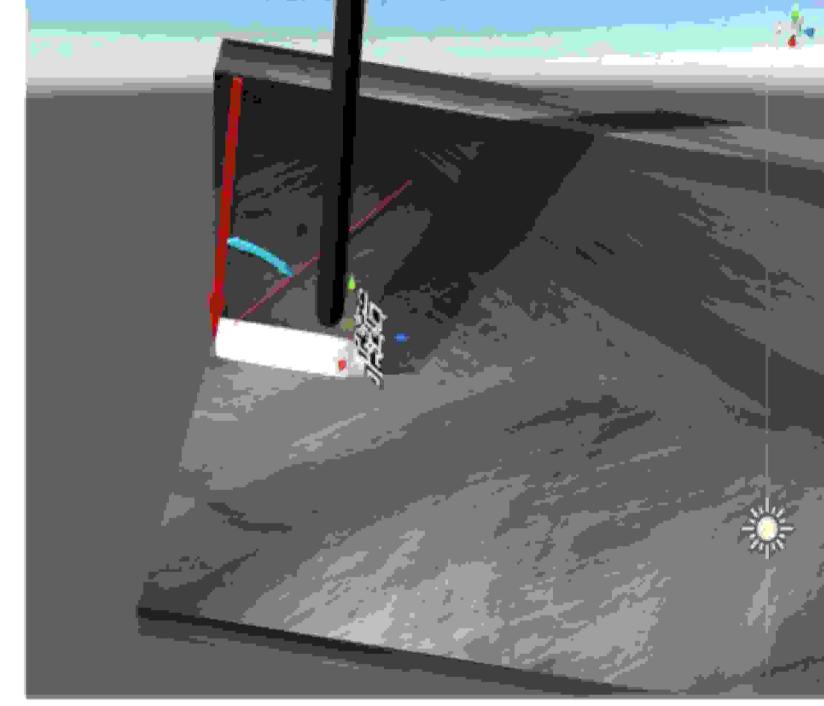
Virtual weld bead on the virtual weld plate
